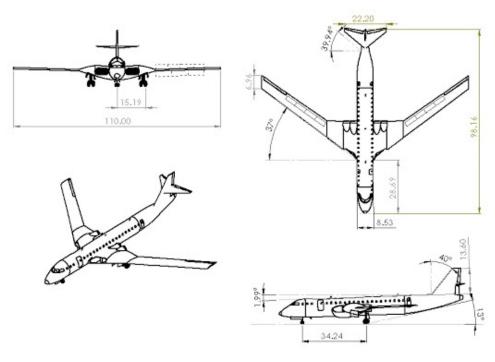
Aeris 3-View Drawing. Dimensions are in feet [8]
